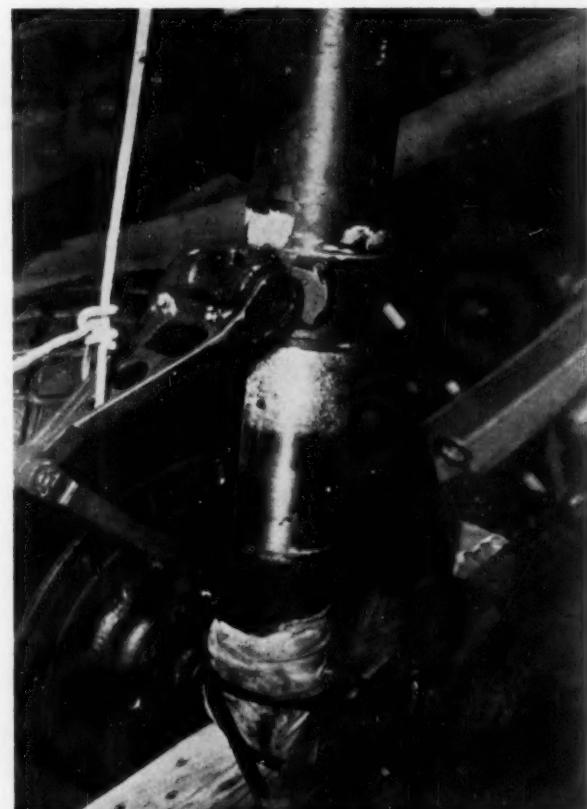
Pitting corrosion of a chromium plated landing gear oleo strut. Minor pitting leads to cutting of hydraulic seal and subsequent leakage, with possible serious results.
